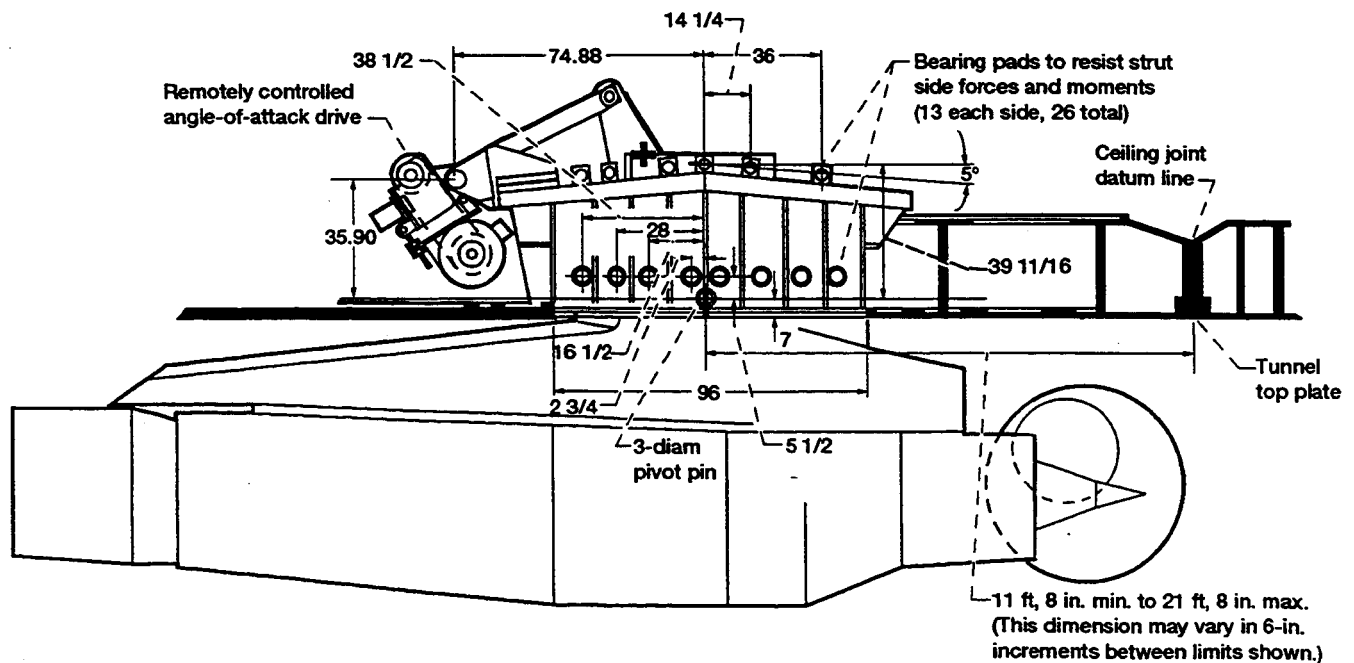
Ceiling strut assembly. Normal force, $\pm 50\,000$ lbf; axial force, $\pm 50\,000$ lbf; pitching moment, $\pm 175\,000$ ft-lbf. (Dimensions are in inches unless otherwise specified. The AFED project engineer can provide reference drawings for assembly of strut support (CR-72200) and installation of model (CF-74320) if requested.)
